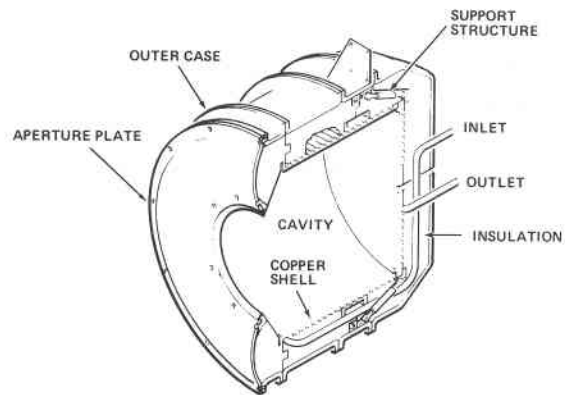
CUT-AWAY VIEW OF RECEIVER ASSEMBLY
